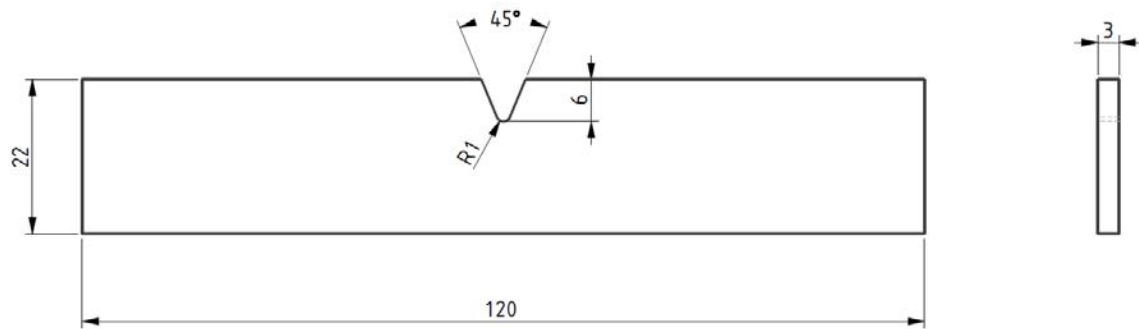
2D technical drawing of the rounded V-notch specimens that have been used for the fatigue tests.
